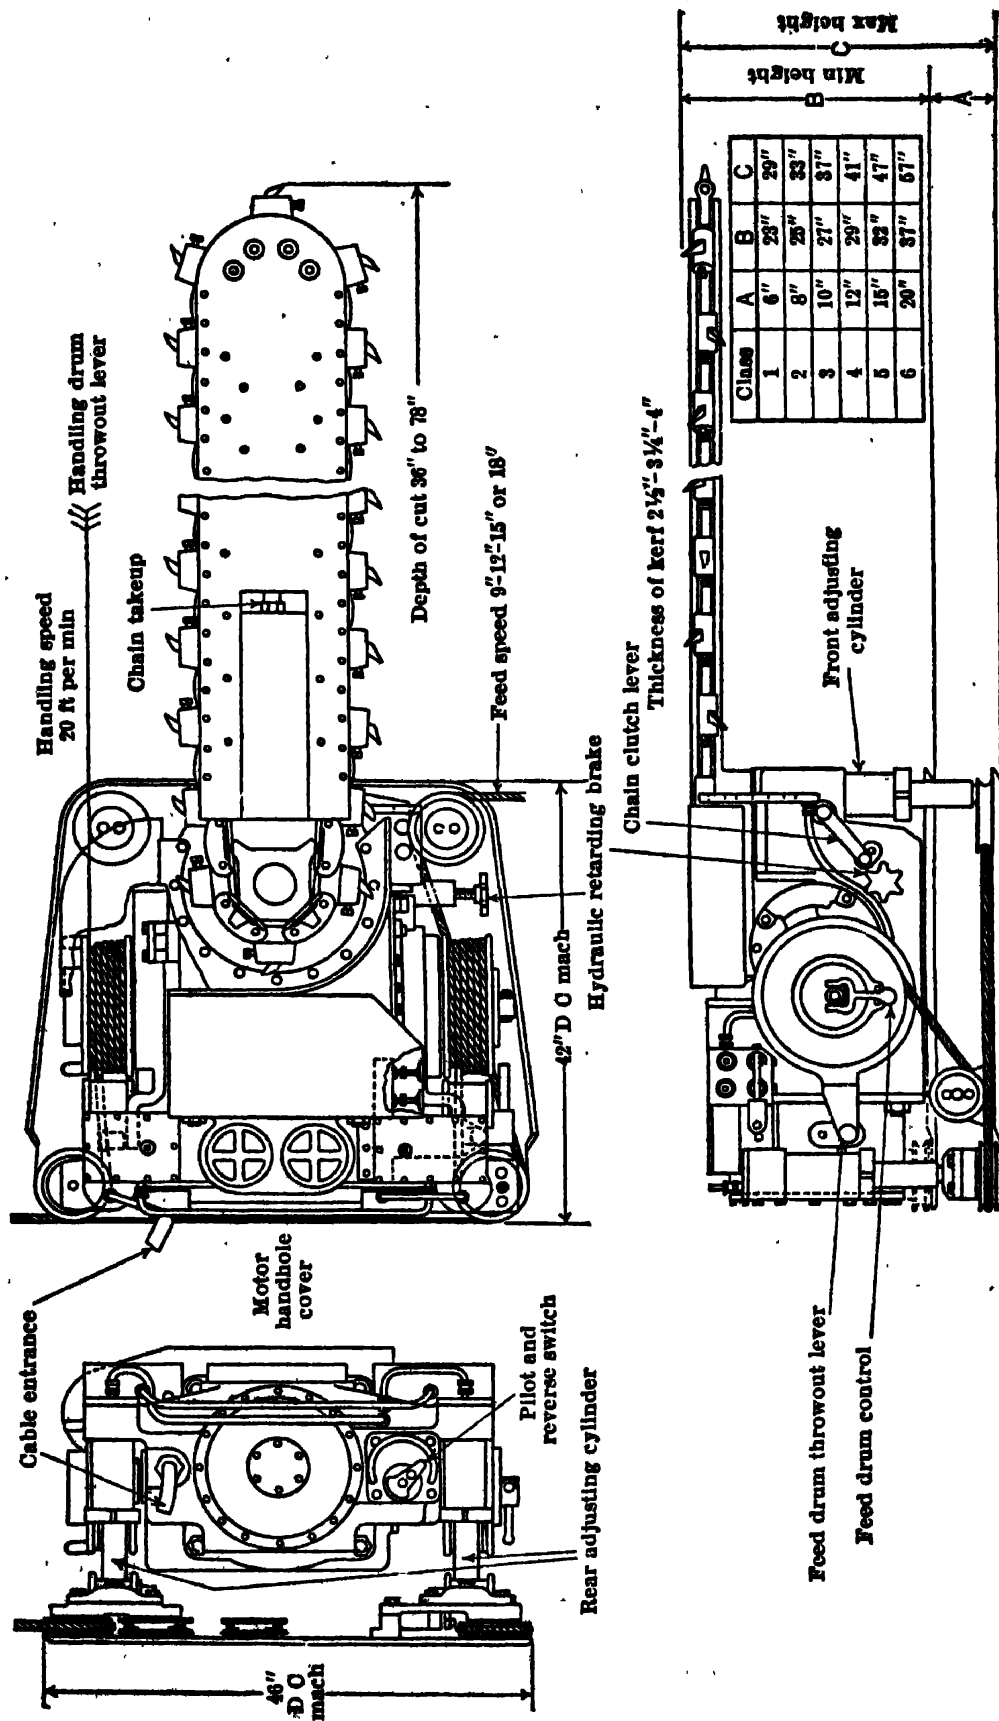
Sullivan Floor-type, Turret, or Top Cutter (9B)
